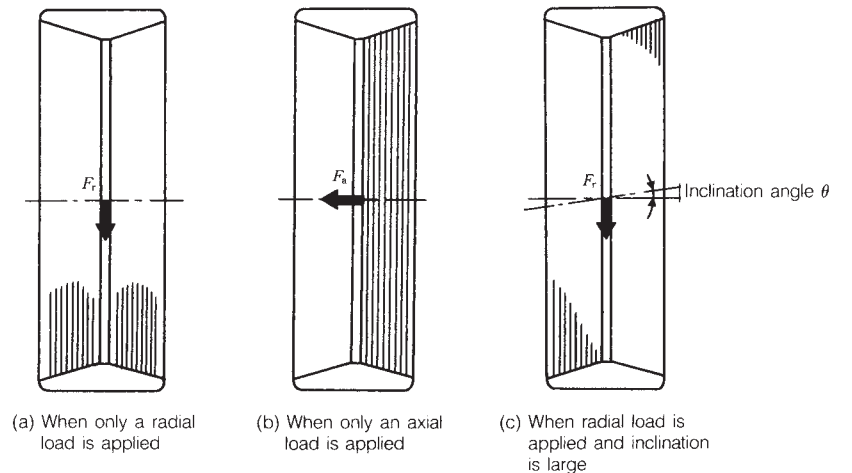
Trace (rolling contact trace) of outer ring of double row tapered roller bearing
